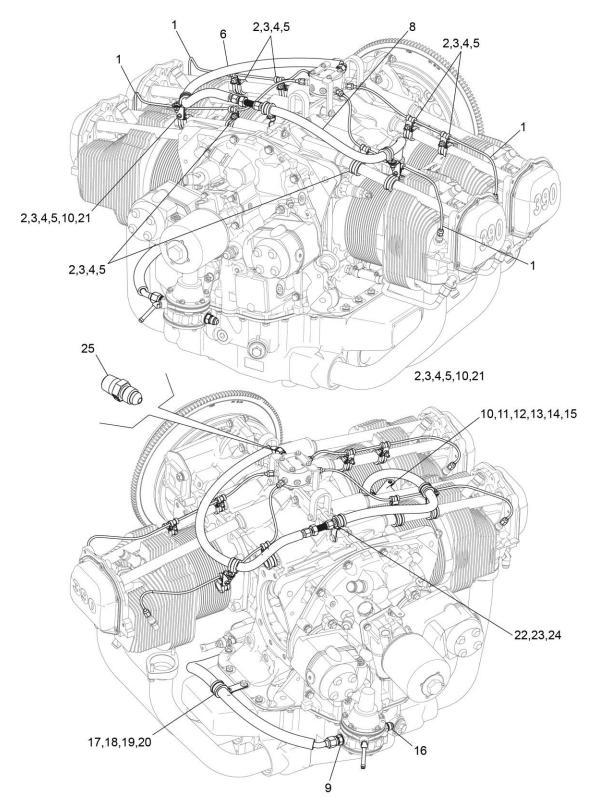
A Fuel Lines, Fuel Hoses, and Attaching Parts (C1A6 and C3A6)
